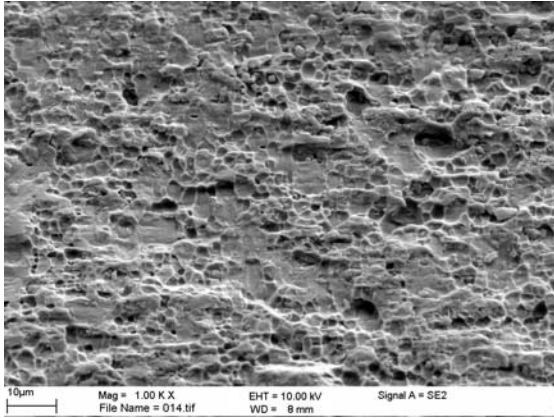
Ductile fracture surface of a ruptured Al strip. Crack starts as an edge crack from the right.
